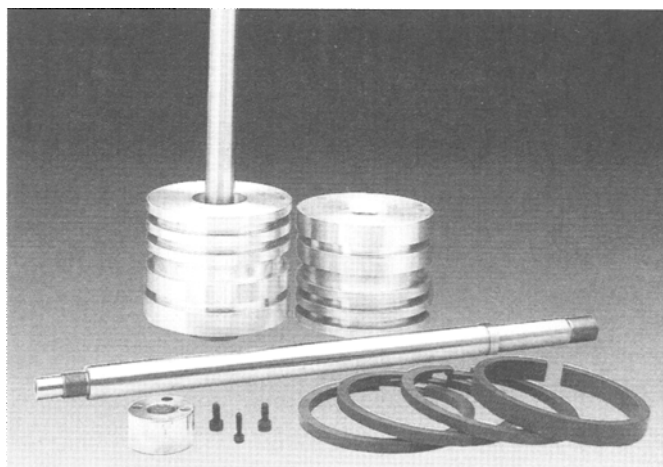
A. Piston rings. The piston rod is manufactured from heat-treated stainless steel and is coated with wear-resistant overlays, such as ceramic, chromium oxide, and tungsten carbide applied by plasma techniques. Piston rod cross-head attachment has mechanical preloading system for the threads. Rider rings and seal rings are manufactured from PTFE filled resins; fillers are matched to the gas, piston speed, and liner specifications. Typical fillers are glass, carbon, coke, or ceramic. (Used by permission: Bul. BCNA-3P100. Howden Process Compressors Incorporated. All rights reserved.)
